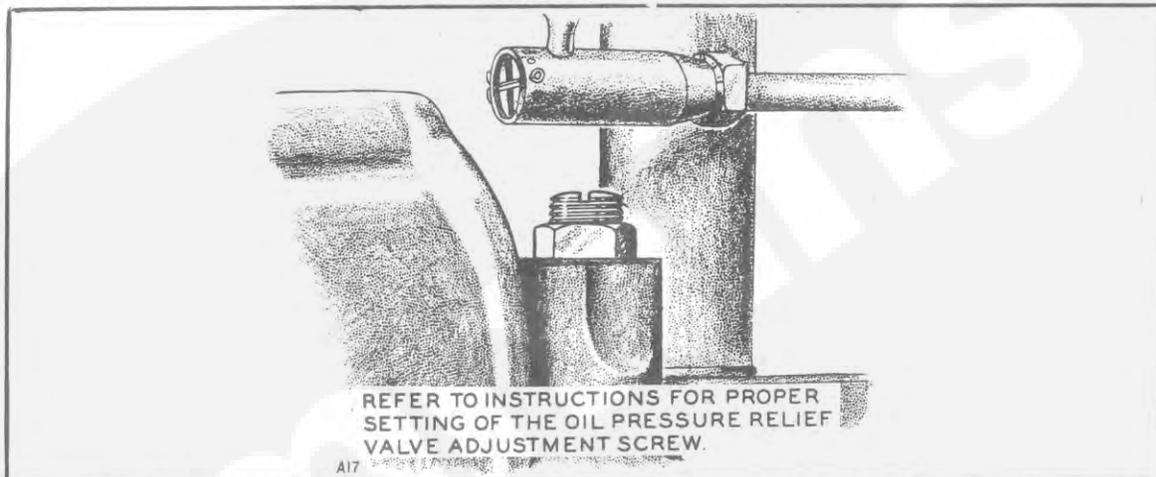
OIL PRESSURE RELIEF VALVE ADJUSTMENT
